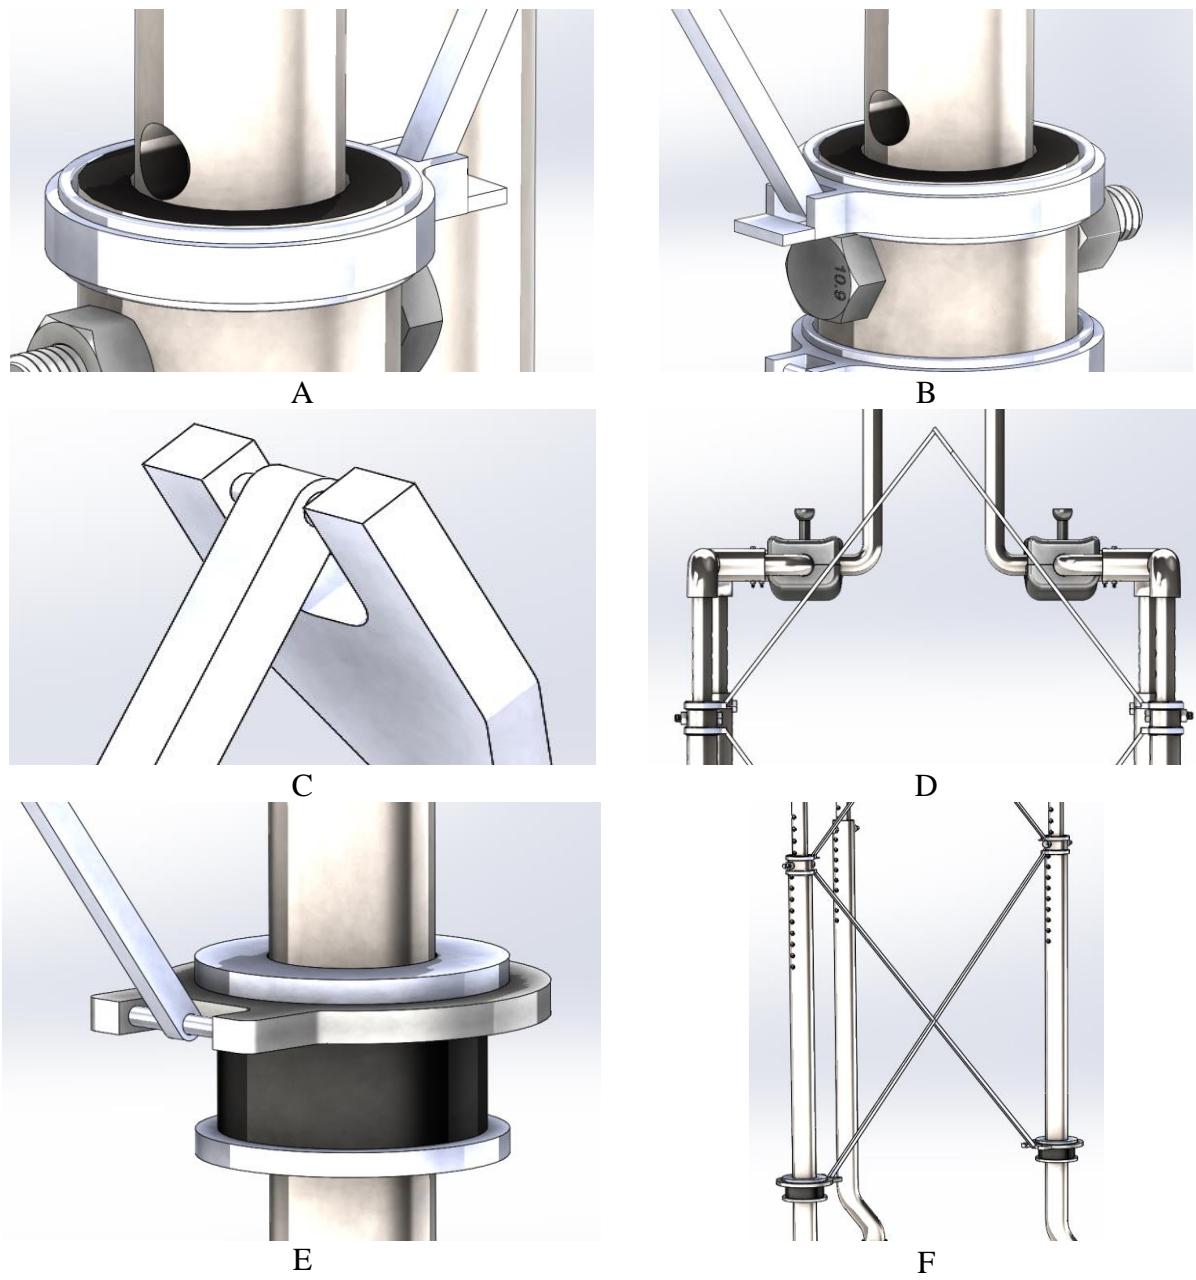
Fixed Poles Highlighting Hinging Mechanism – Walker Fully Open
